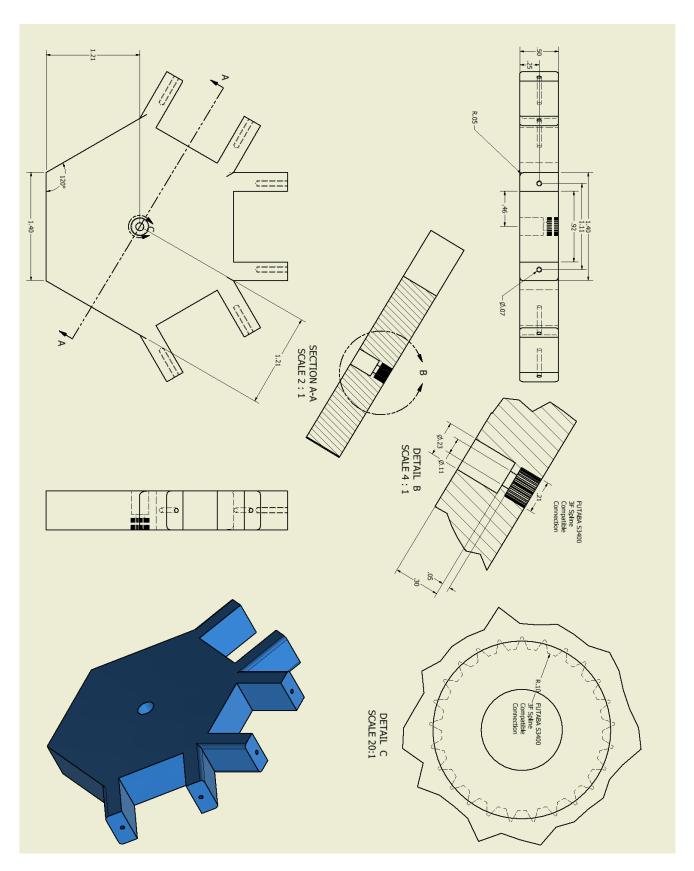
Pen Holder Rotational Platform Mechanical Drawing (Units: in)
